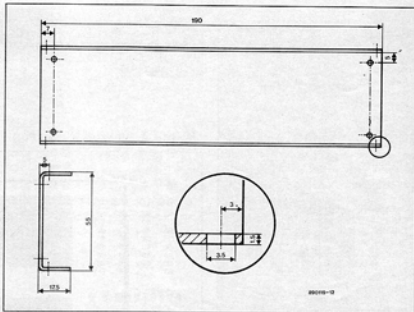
Construction details of the aluminium bracket that holds the PCB.
